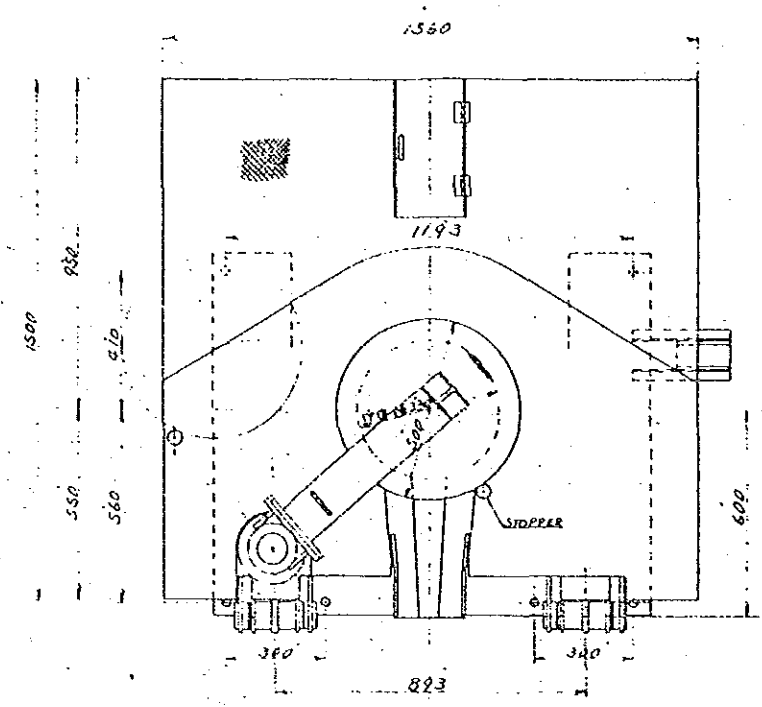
Assemble drawing of coal pulverize and coal injection system
